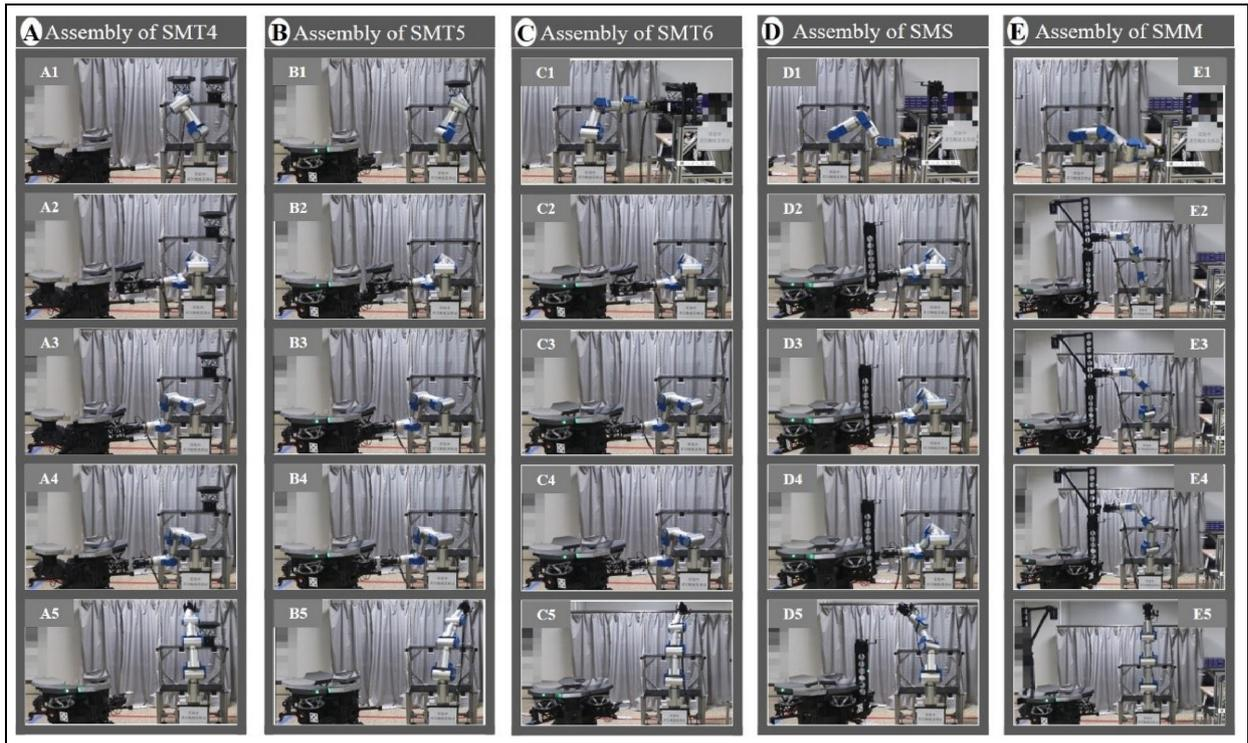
Modular space telescope ground assembly experimental process: (A) assembly of SMT4, (B) assembly of SMT5, (C) assembly of SMT6, (D) assembly of SMS, and (E) assembly of SMM.
